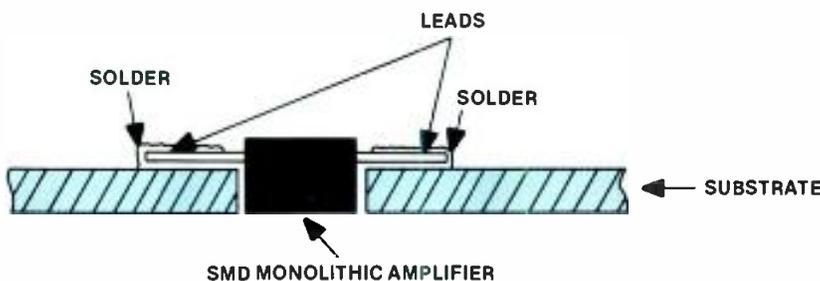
Surface-mount devices are soldered to the metal circuit traces rather than mounted in holes or to pads.
